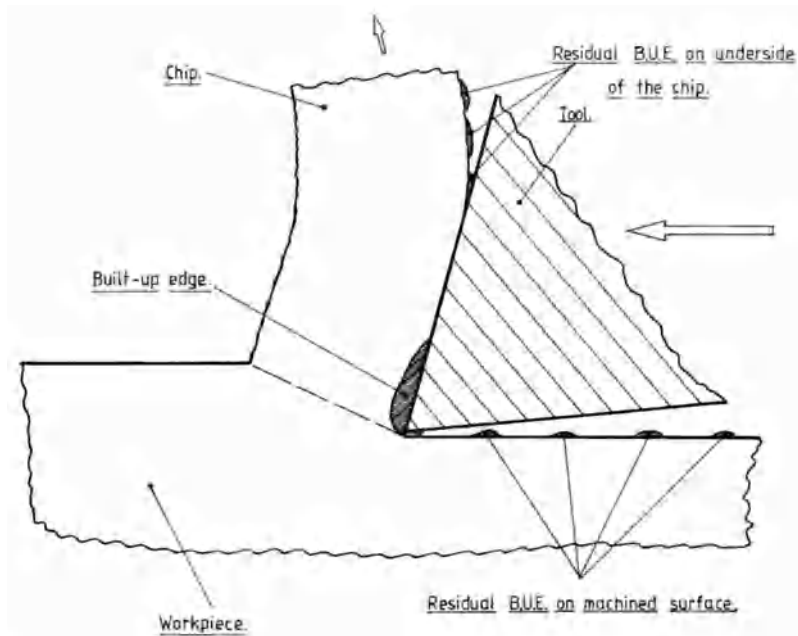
Build-up on the tool and residual effects on the workpiece and chip.
